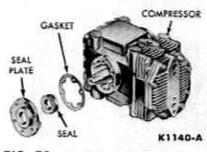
Crankshaft Seal Assembly sor, and add or remove oil if necessary. Connect the compressor into the system.
